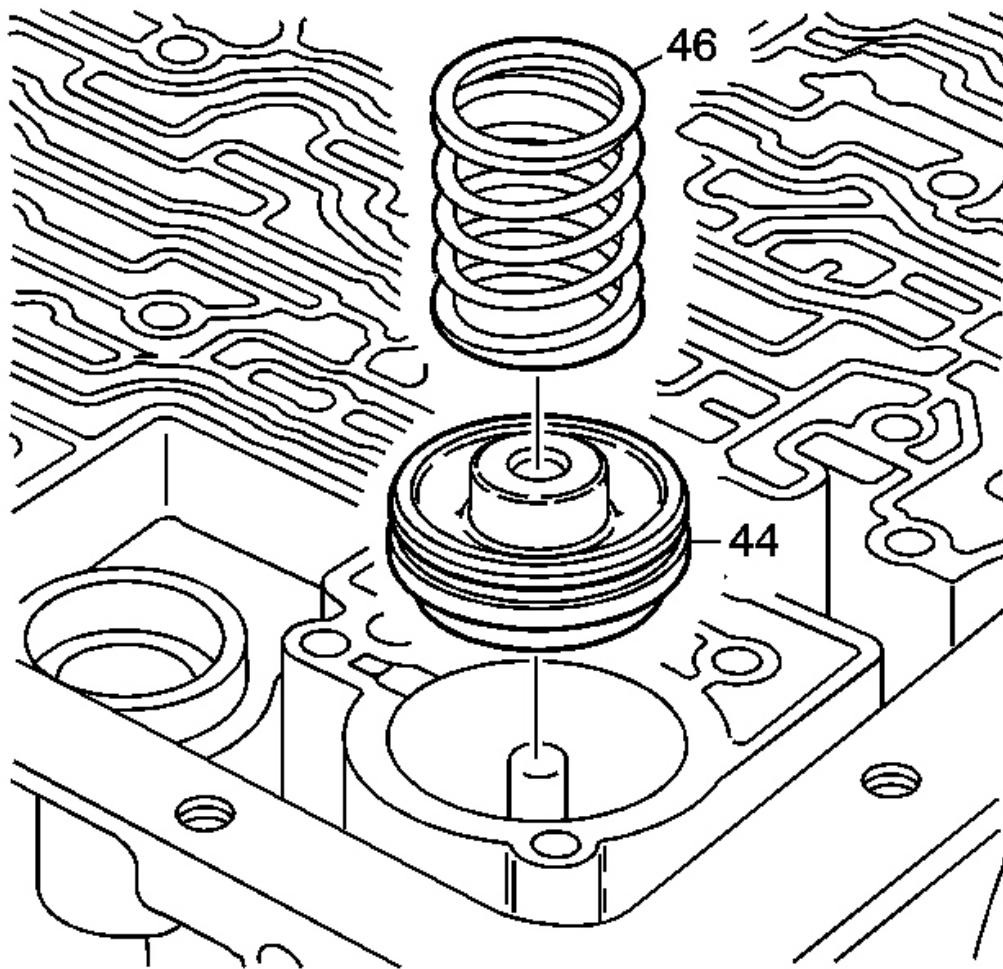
View Of 3-4 Accumulator Piston & Seal Assembly
